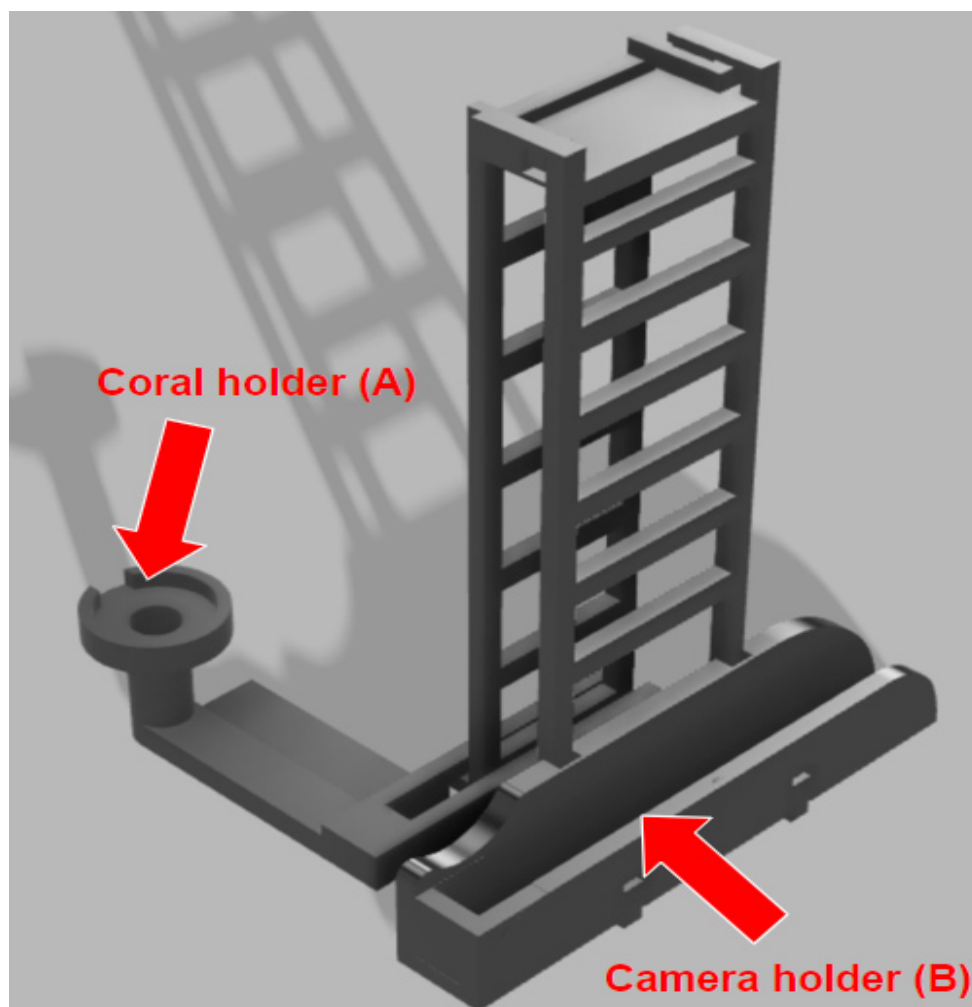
Fusion 360 digital rendering of 3D printed tool; camera tool printed using Cura (printing software).
